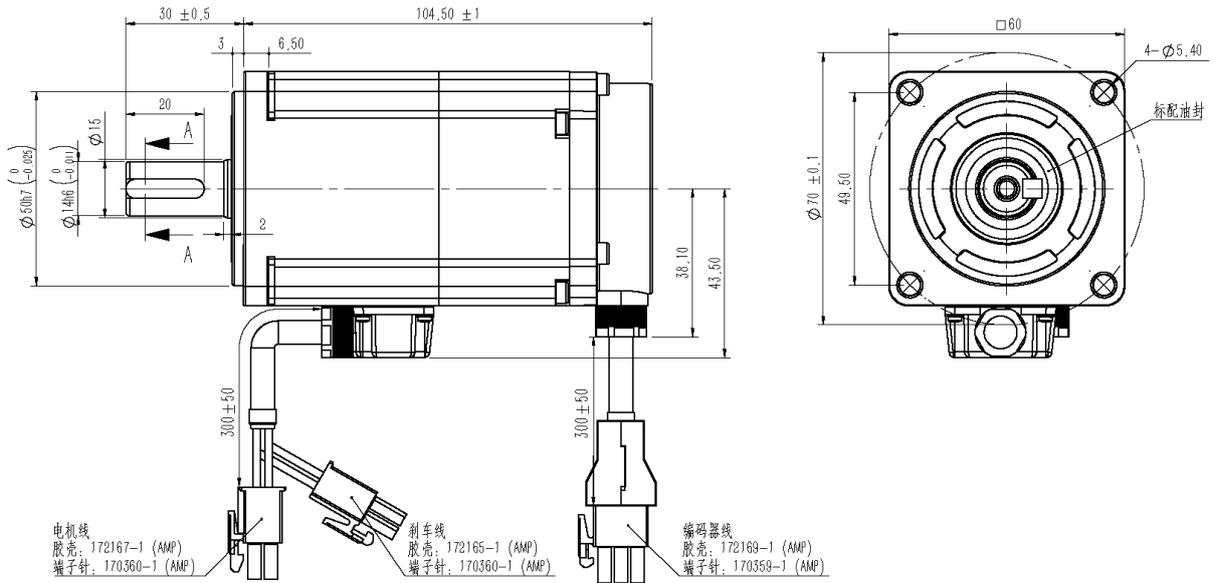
200W servo motor (with holding brake) external dimension drawing
